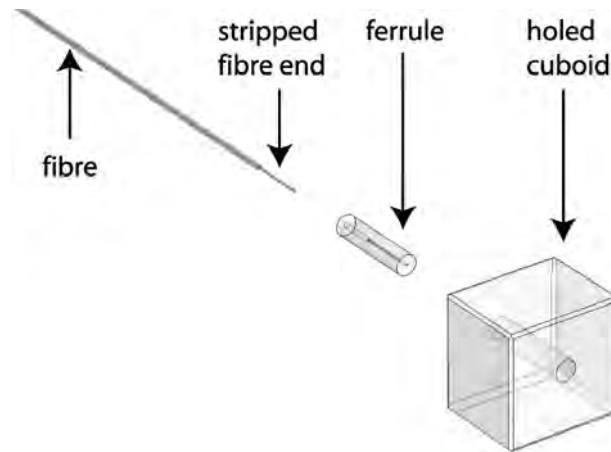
Exploded diagram of fibre mounting assembly (without strain relief).
